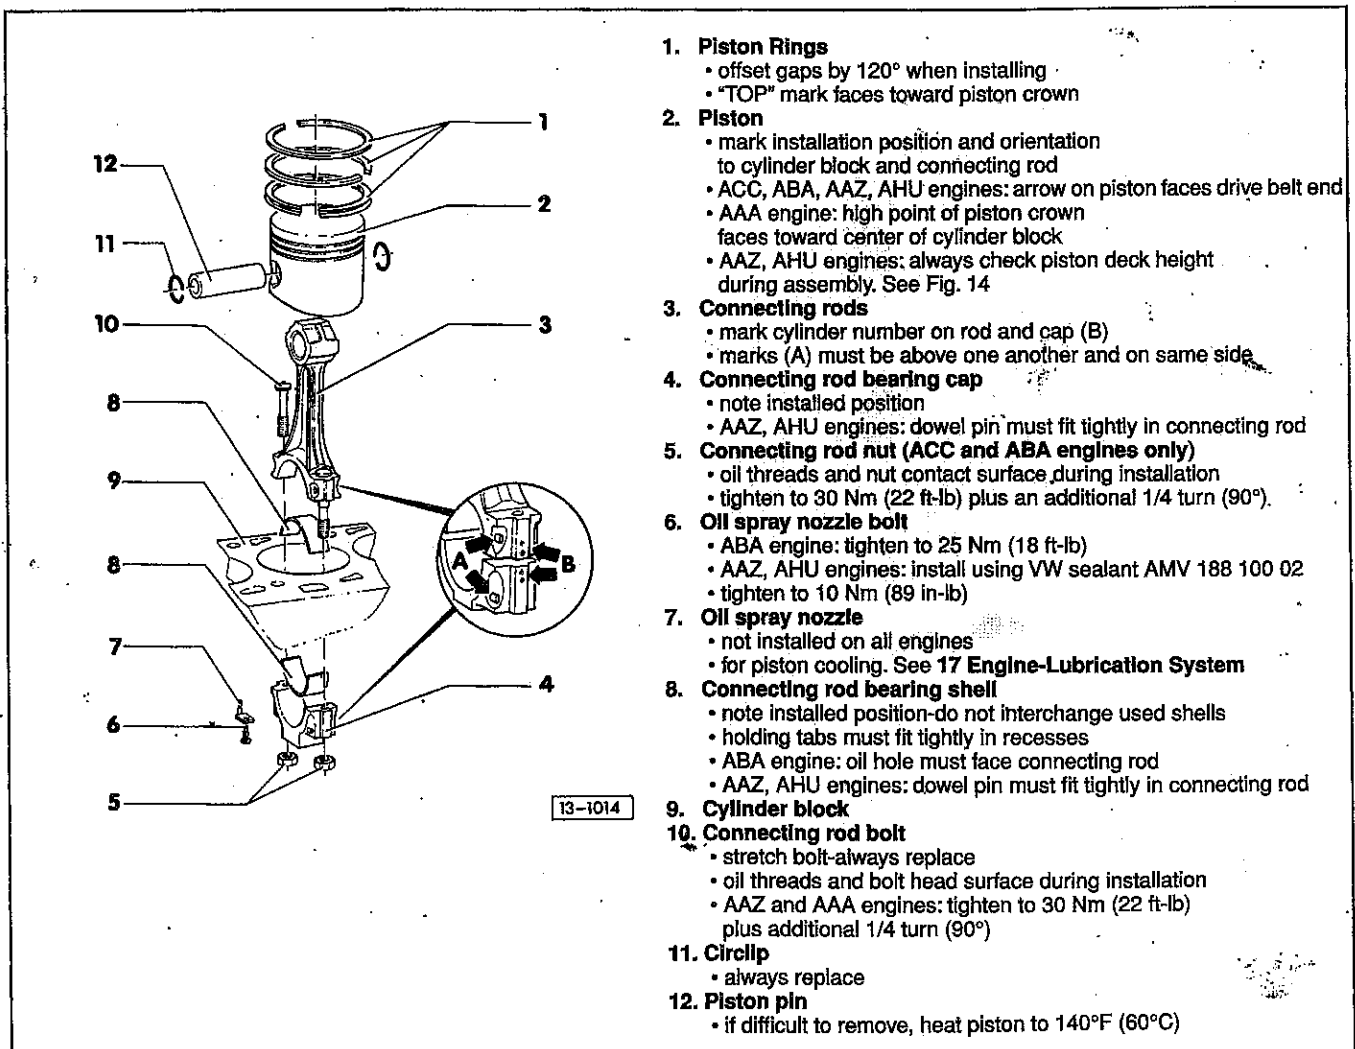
Piston and connecting rod assembly for ABA engine. Connecting rod assemblies on other engines are similar.
